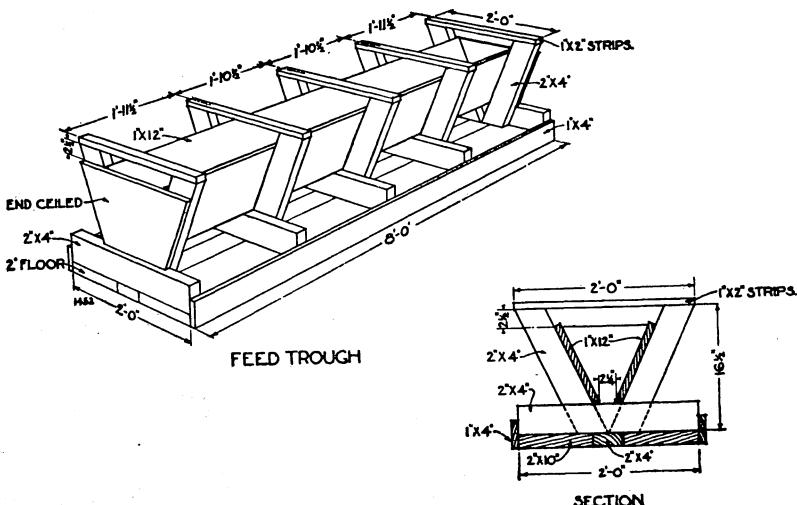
Detailed plan for construction of flat-bottomed trough shown in Figure 7.
